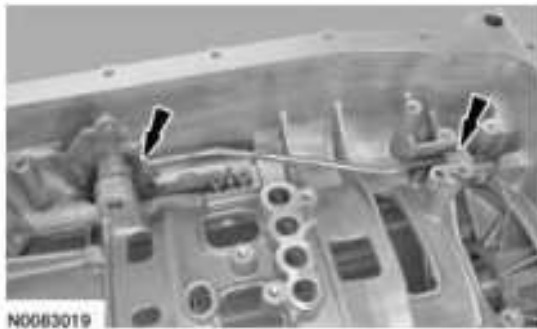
Installing Manual Control Lever Shaft Seal
